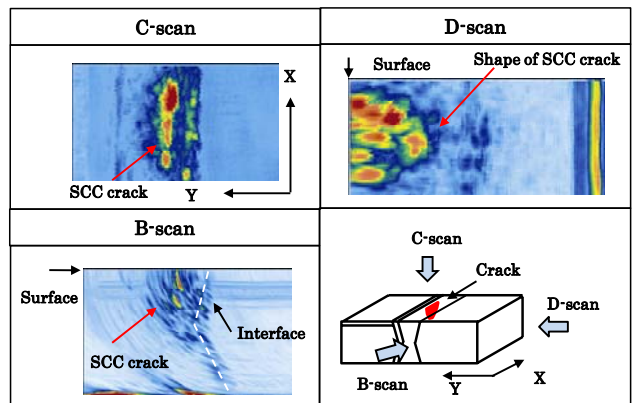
Inspection images of DMW specimen with circumferential SCC crack by phased array UT
